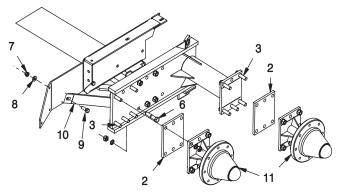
Mounting Spacer Plate, Hub & Spindles
